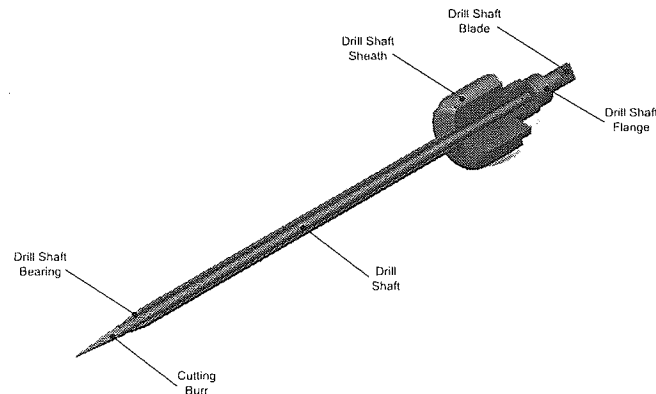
Drill shaft coupling and cantilever alignment tool (inset).
